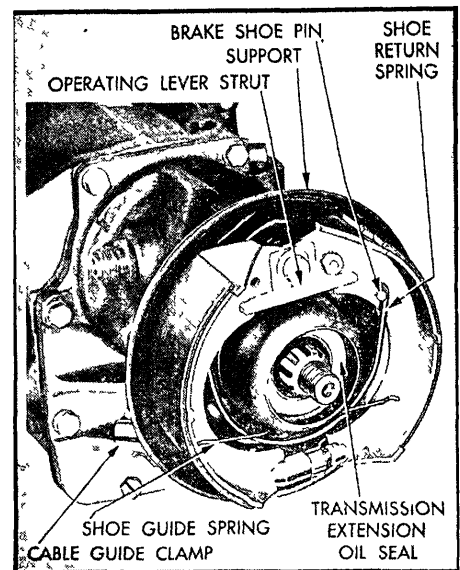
Internal shoe type emergency brake. Typical of all 1951-52 Chrysler and De Soto, and Dodge with automatic transmission
